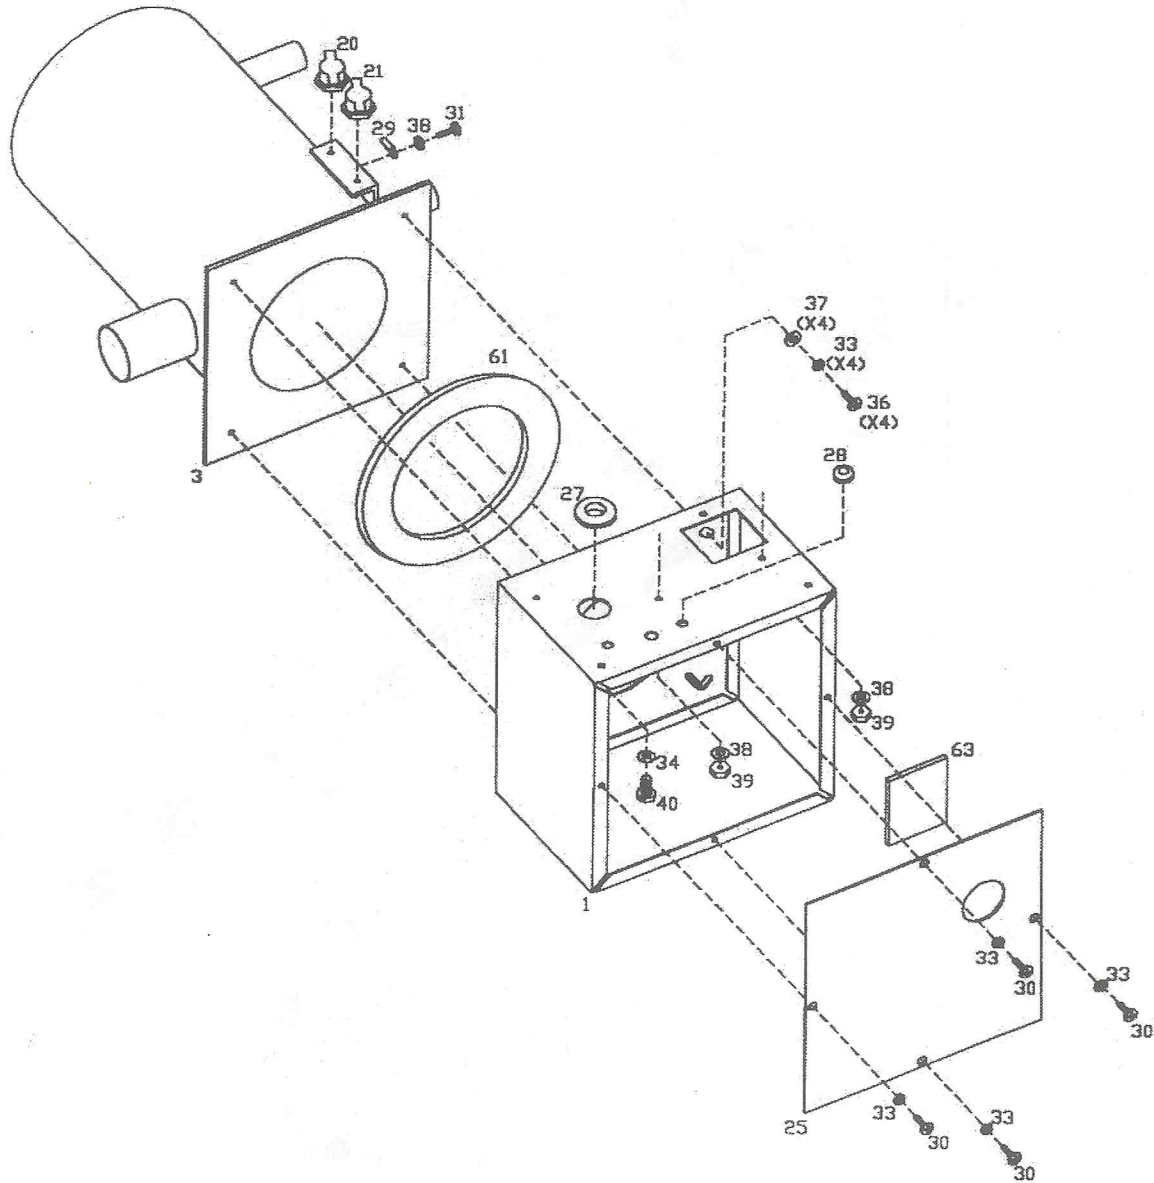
WATER JACKET AND BURNER BOX ASSEMBLY
